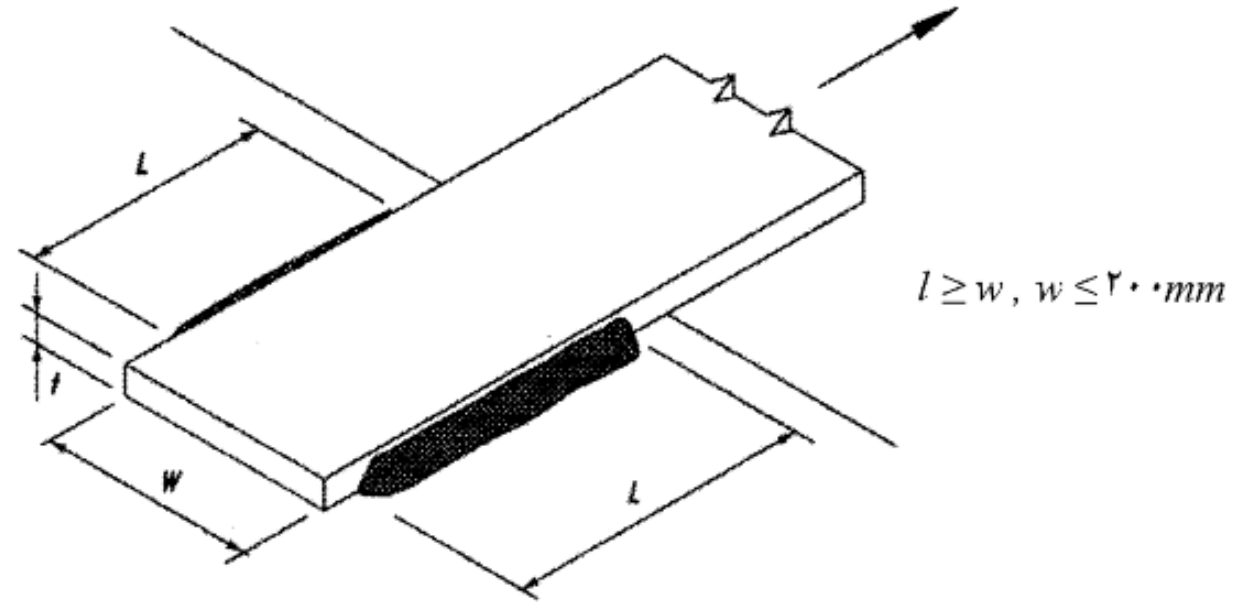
Minimum Length of Longitudinal Fillet Welds at End of Plate or Flat Bar Members (see 2.9.2)
